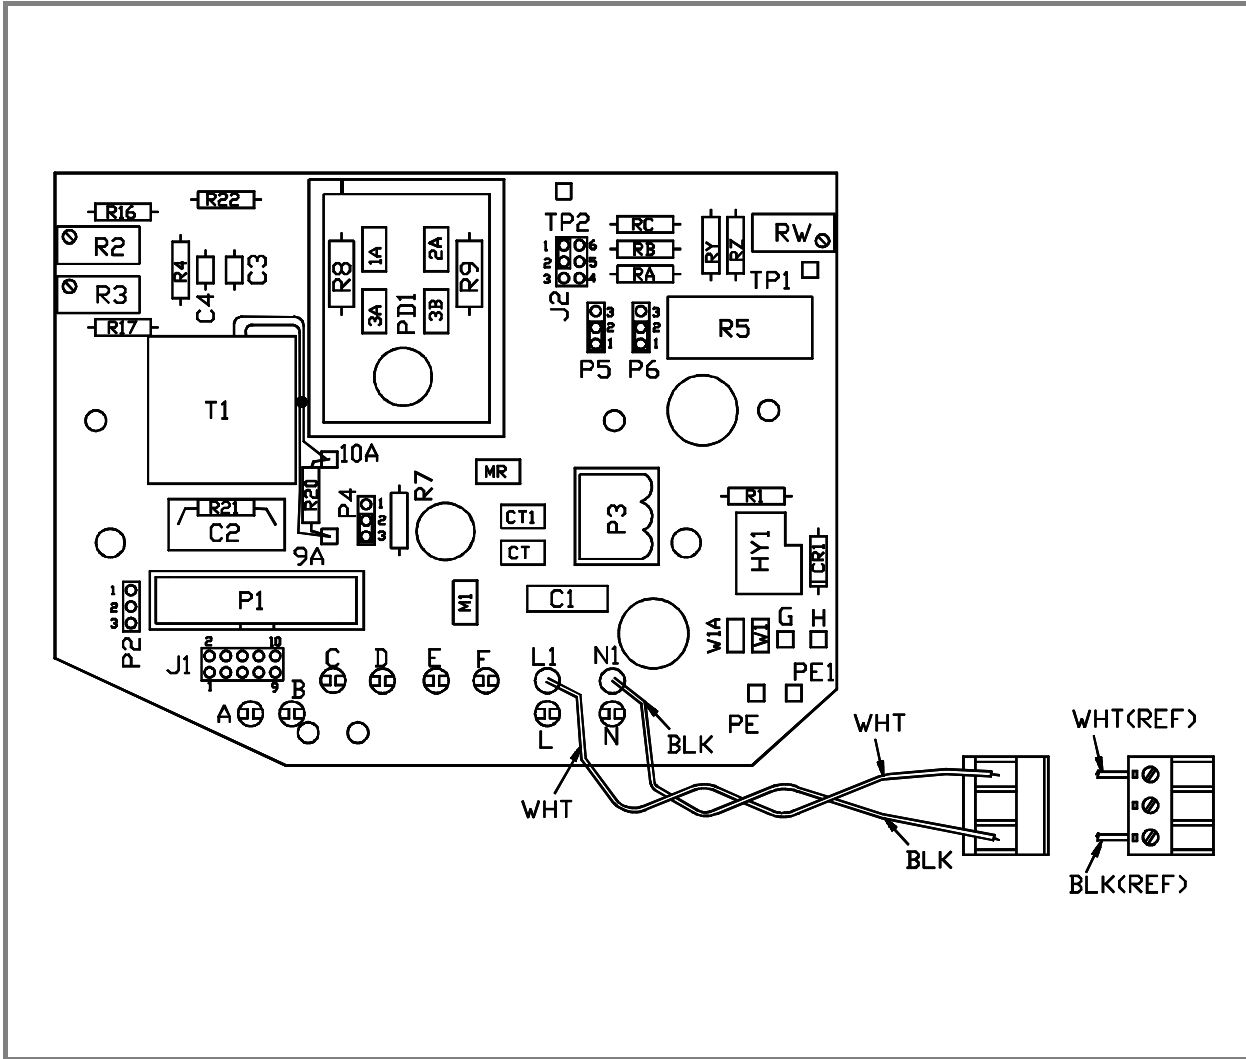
686B762U02 PRIMARY BOARD ASSEMBLY
